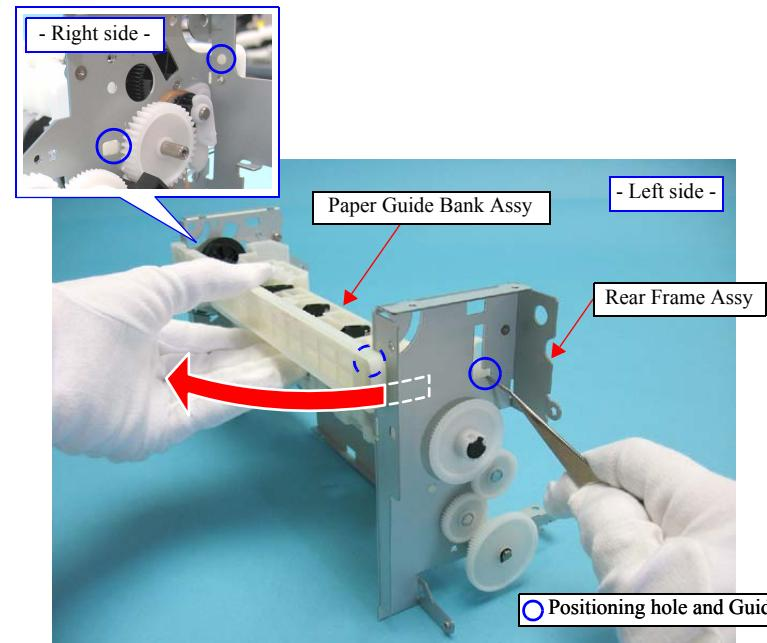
Removing the Paper Guide Bank Assy (2)
